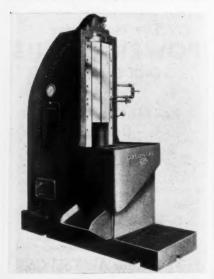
Colonial "Single Ram" surface broaching machine available in eleven sizes from six to twenty-five tons.
